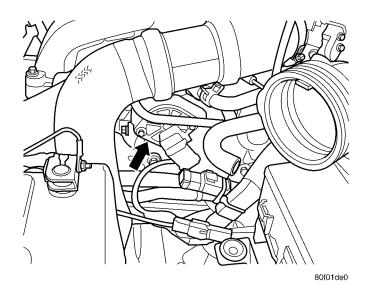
CAMSHAFT POSITION SENSOR - 2.4L TURBO
